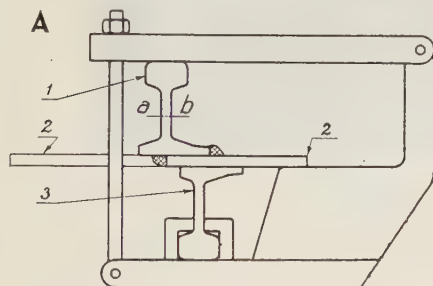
Welding a stock rail on a bearing plate.
